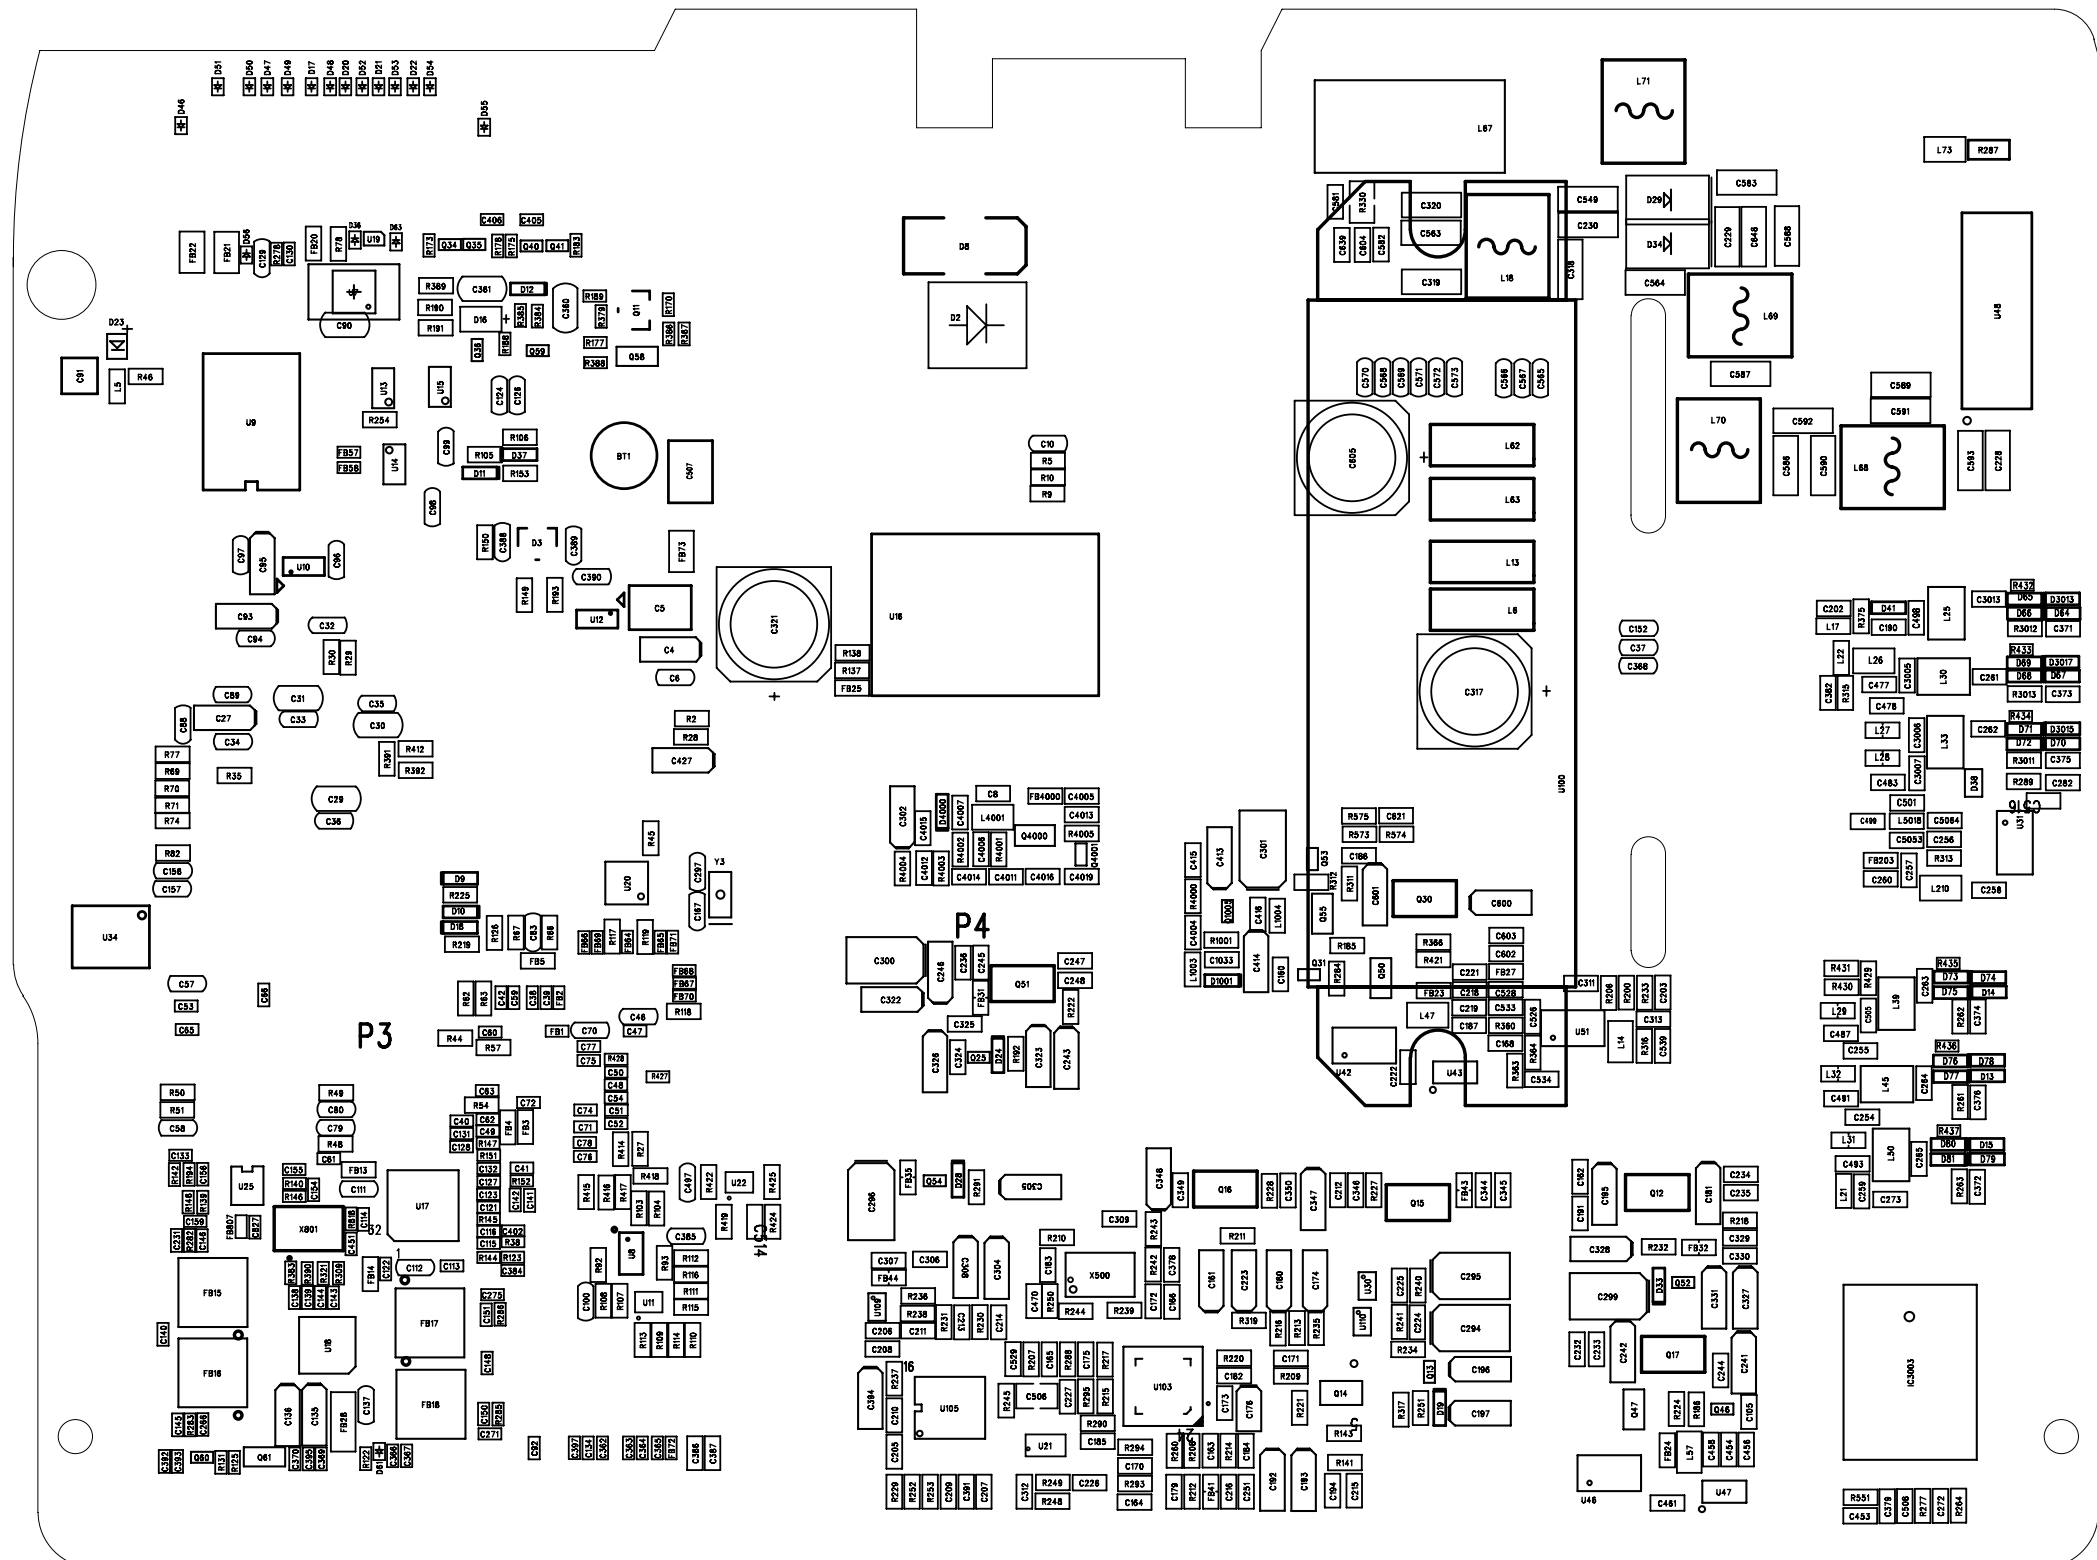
TM840 136-174MHz Keypad Board Bottom Side PCB View
